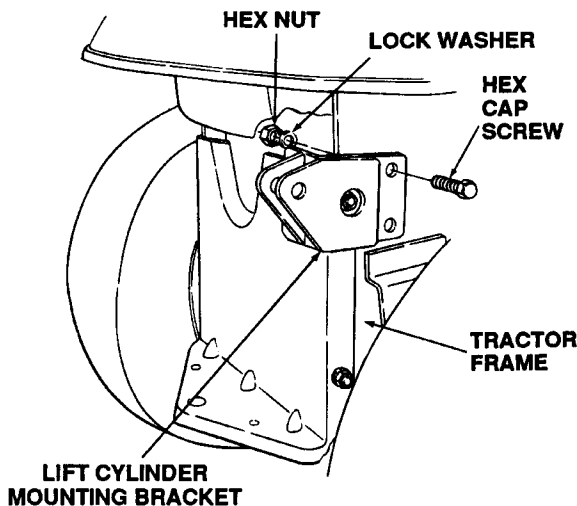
Installing Lift Cylinder Mounting Bracket.
